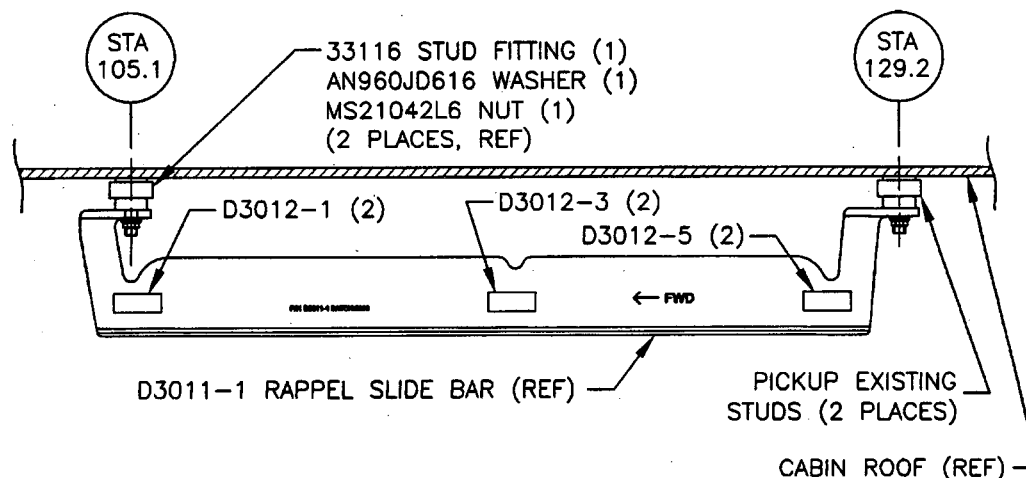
Installation of D205-523-043 Slide Bar Assembly
